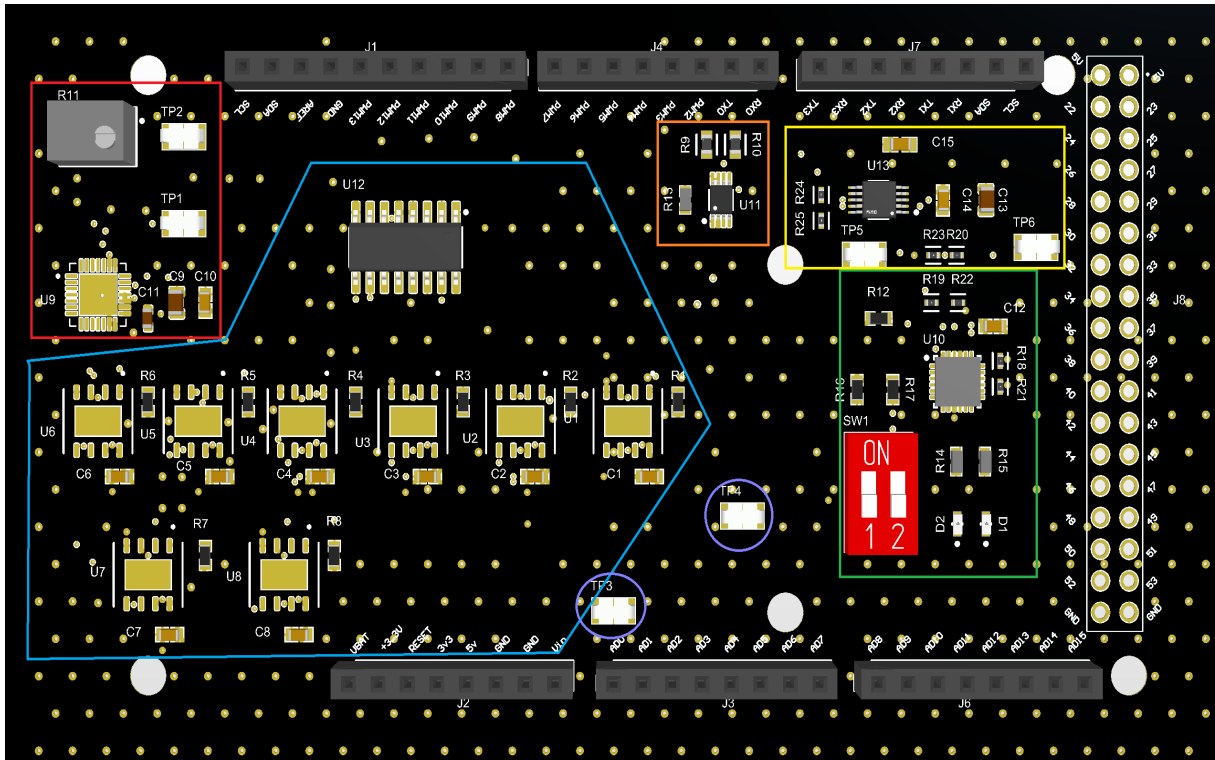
3D view of the testing PCB that was plugged into the evaluation board.
